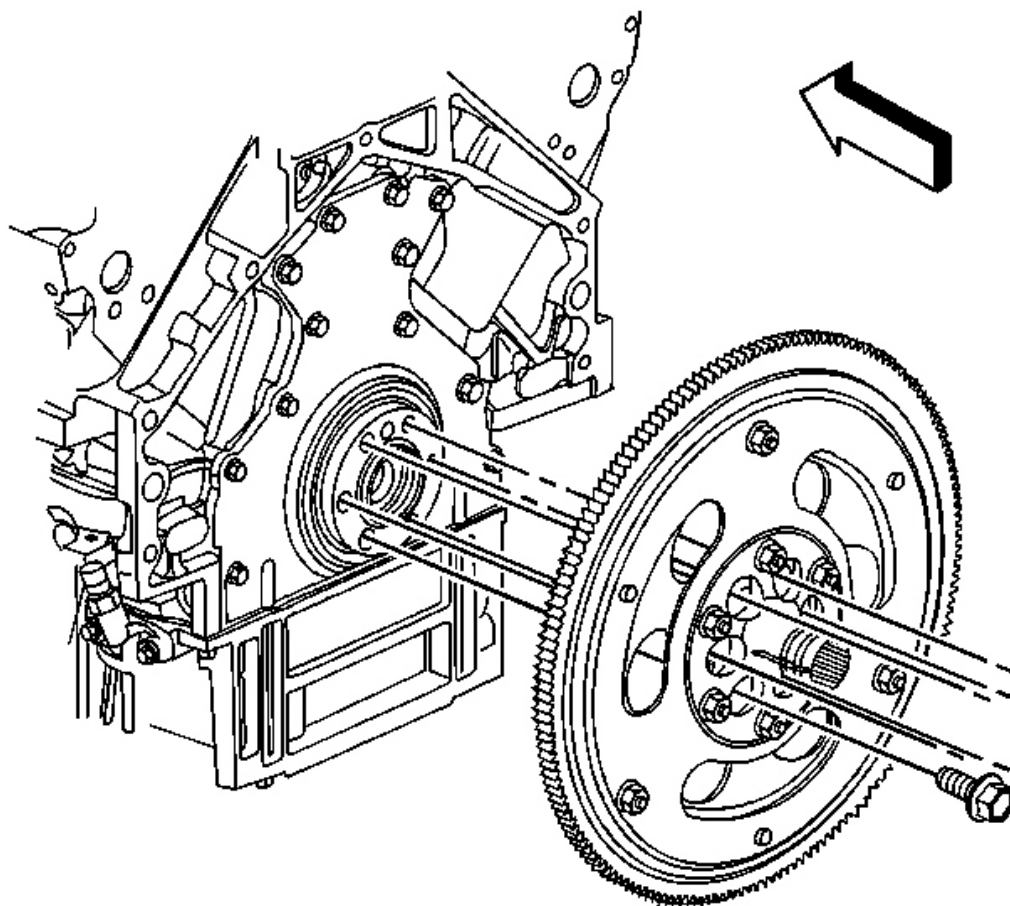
Automatic Transmission Engine Flywheel & Bolts
